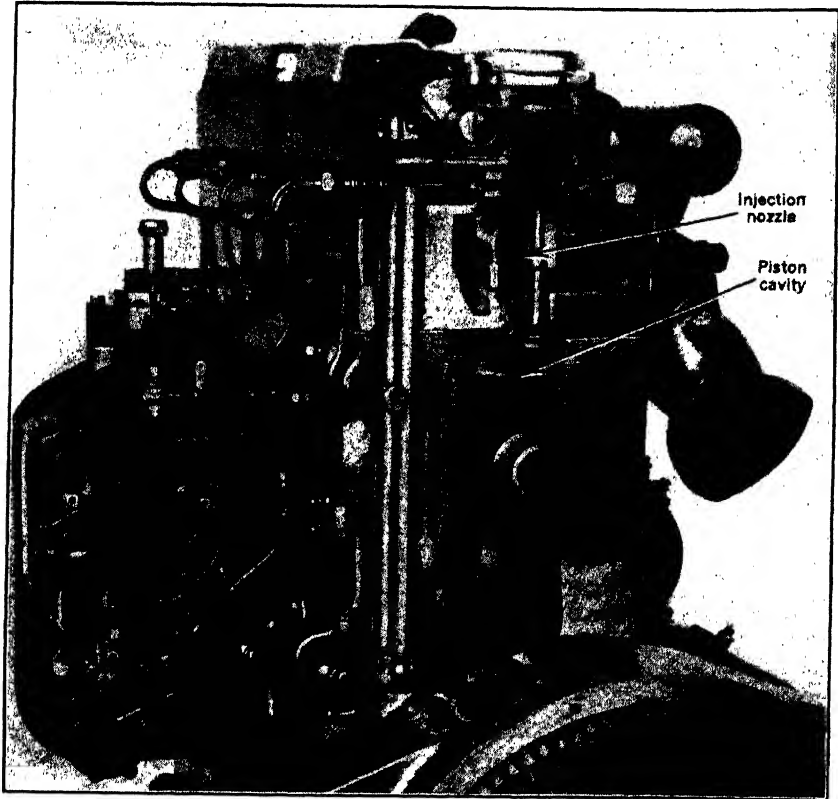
Cutaway view of Cummins automotive type Diesel engine.
